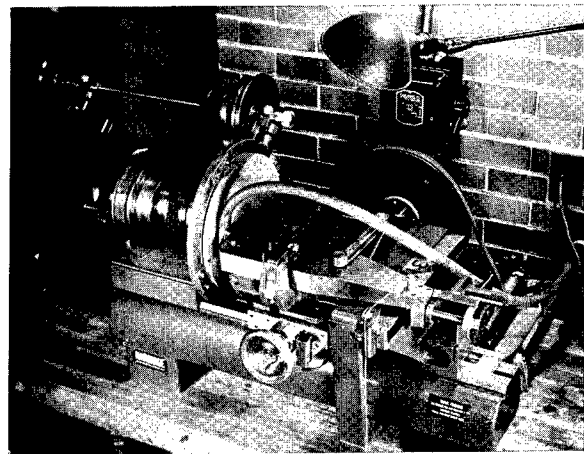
B. 1-to-1 aspheric contouring machine. Top view.
